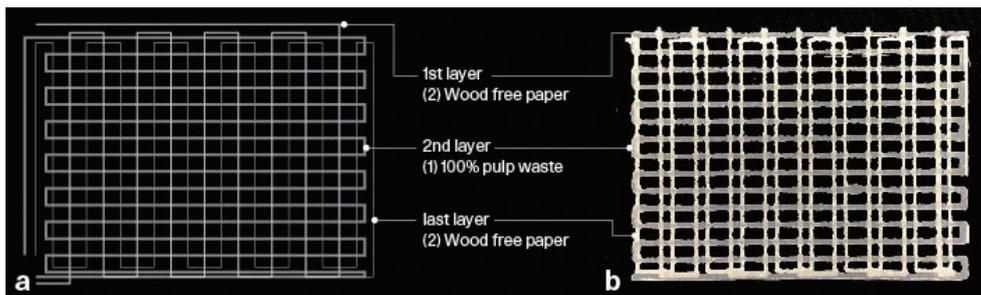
Printing paper in a mesh pattern. (a) Design data. (b) The fabricated multi-layered mesh paper.
